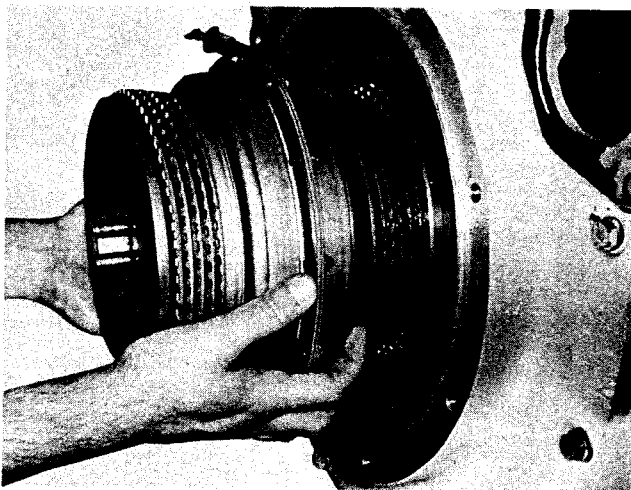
, (V22001). Installing Capitol gear clutch assembly
